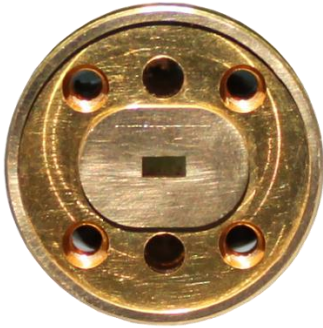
Photograph of the FSM-45 flange in the WR 6.5 size.
